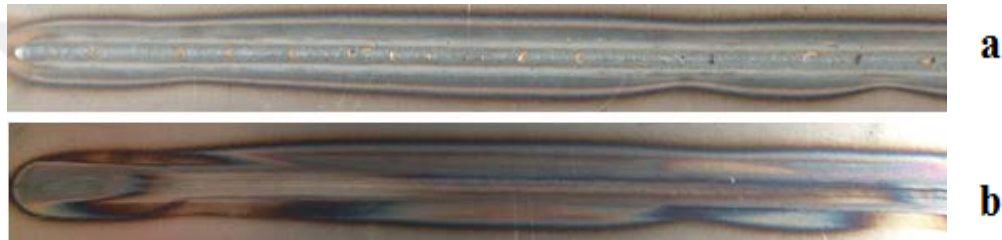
Welded specimen under the welding conditions of 20th Run
